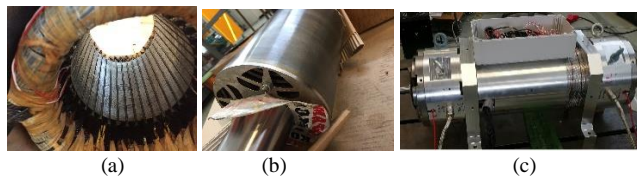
(a) Stator, (b) rotor and (c) prototype machine with the 2 AMBs.
